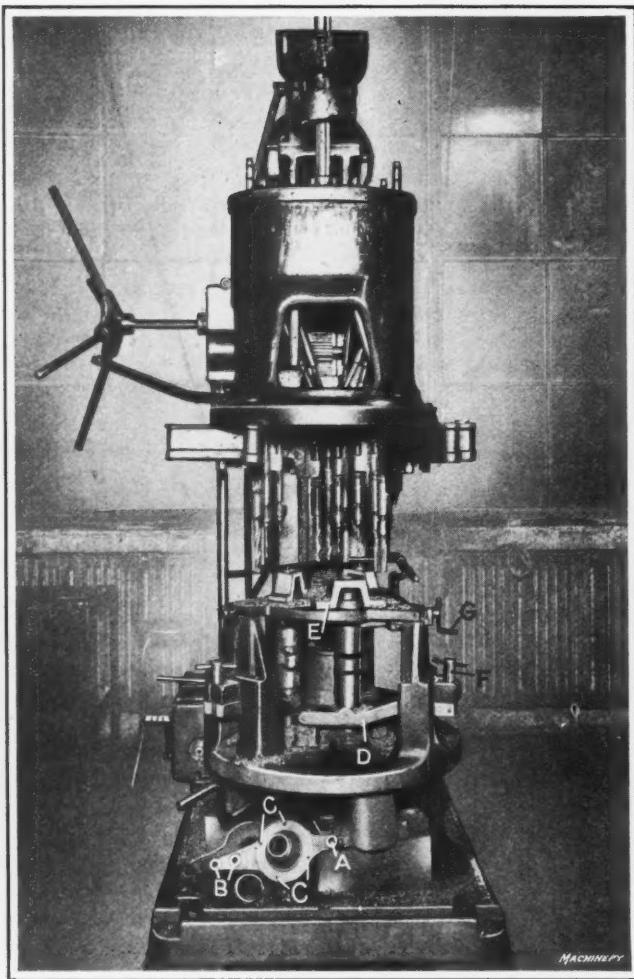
Ten-spindle Drilling Machine built by National Automatic Tool Co. engaged in drilling and reaming Rear Axle Spiders
